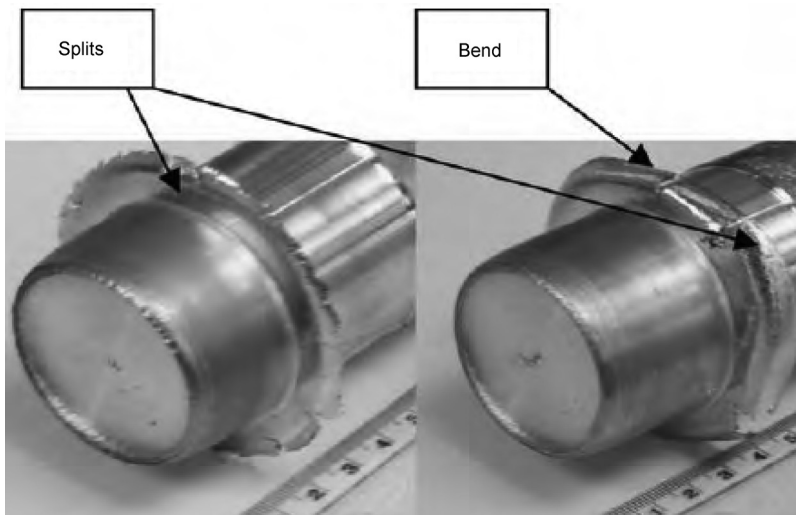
Cracks caused by a large amount of bulging. Source: Ref 12.10
